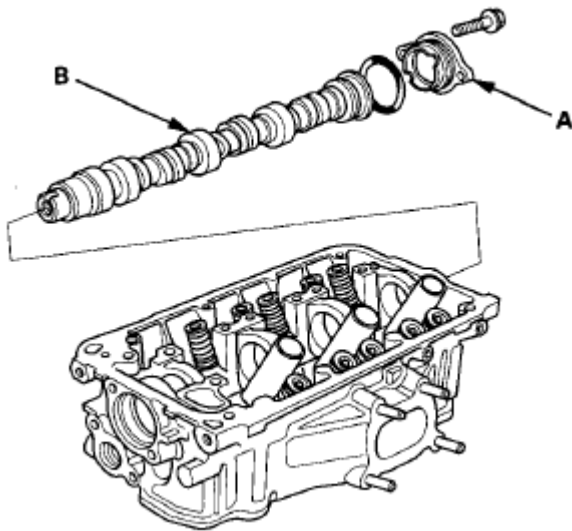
Identifying Camshaft Thrust Cover And Camshaft
